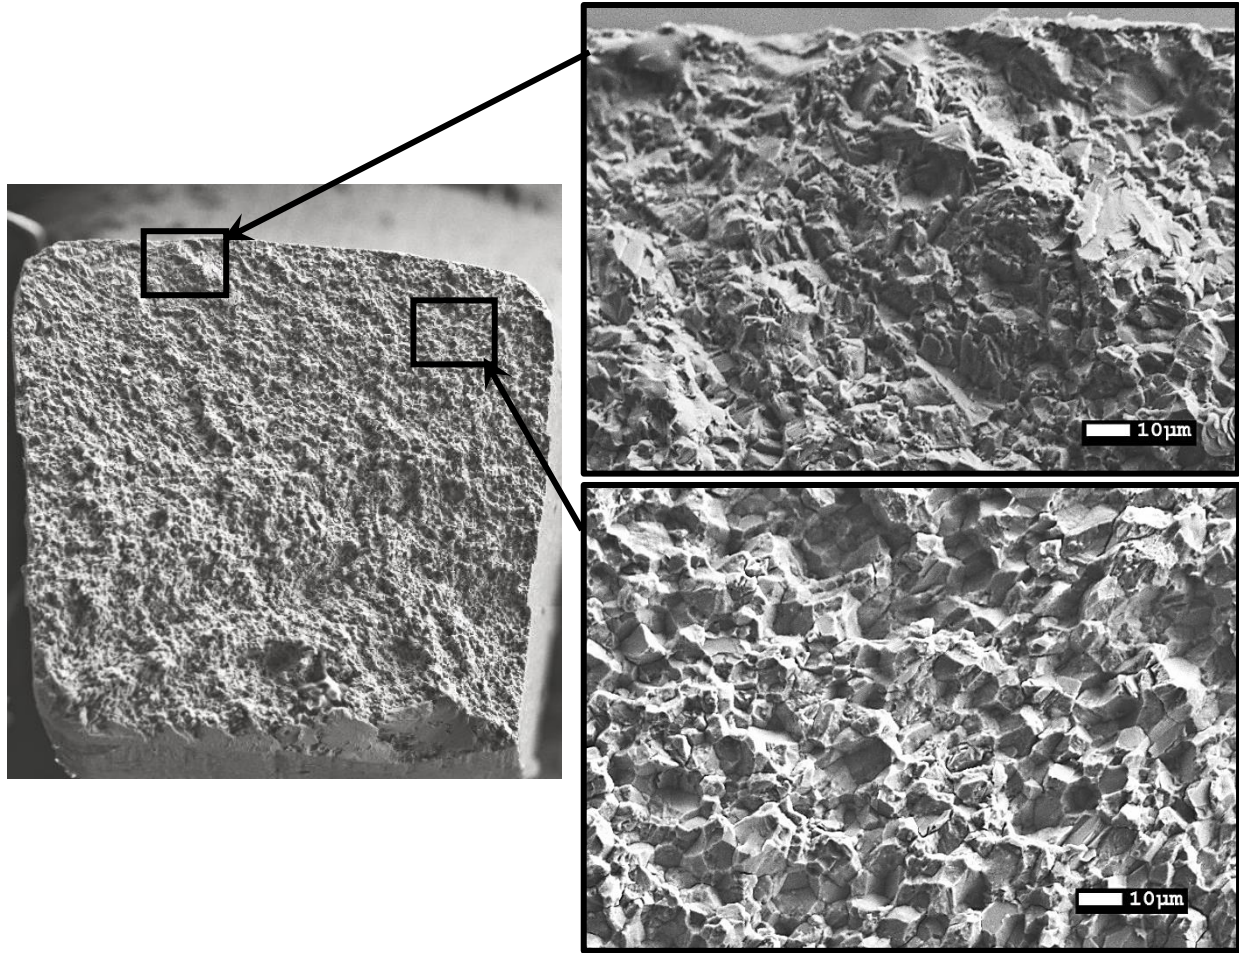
Fracture surface of irradiated fatigue specimen showing atypical region near inner diameter and intergranular fracture typical of the rest of the fracture surface.
